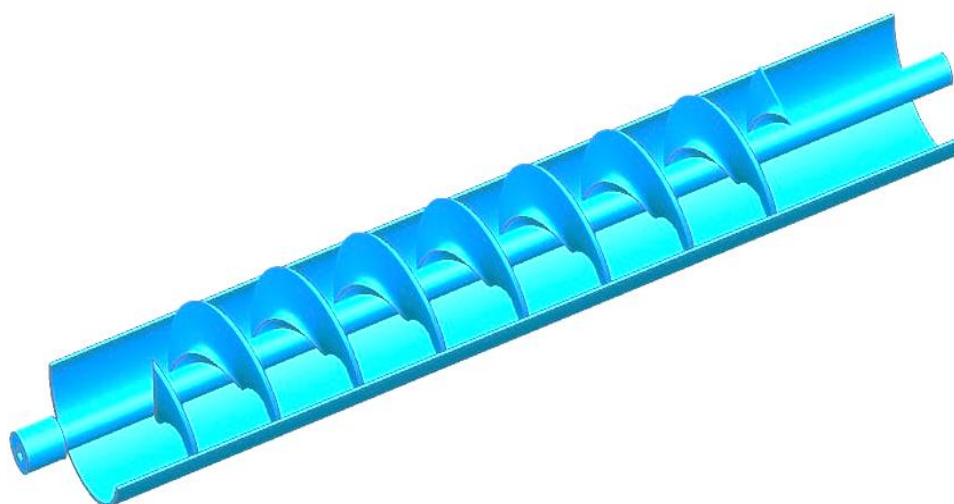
Spiral-shaped screw turbine attached to the shaft
